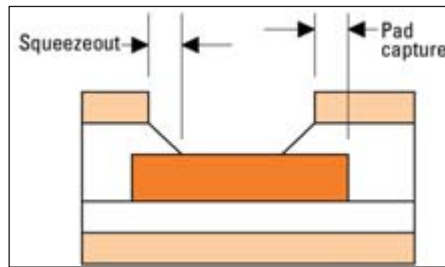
This edge view shows pad capture and adhesive squeezeout.
